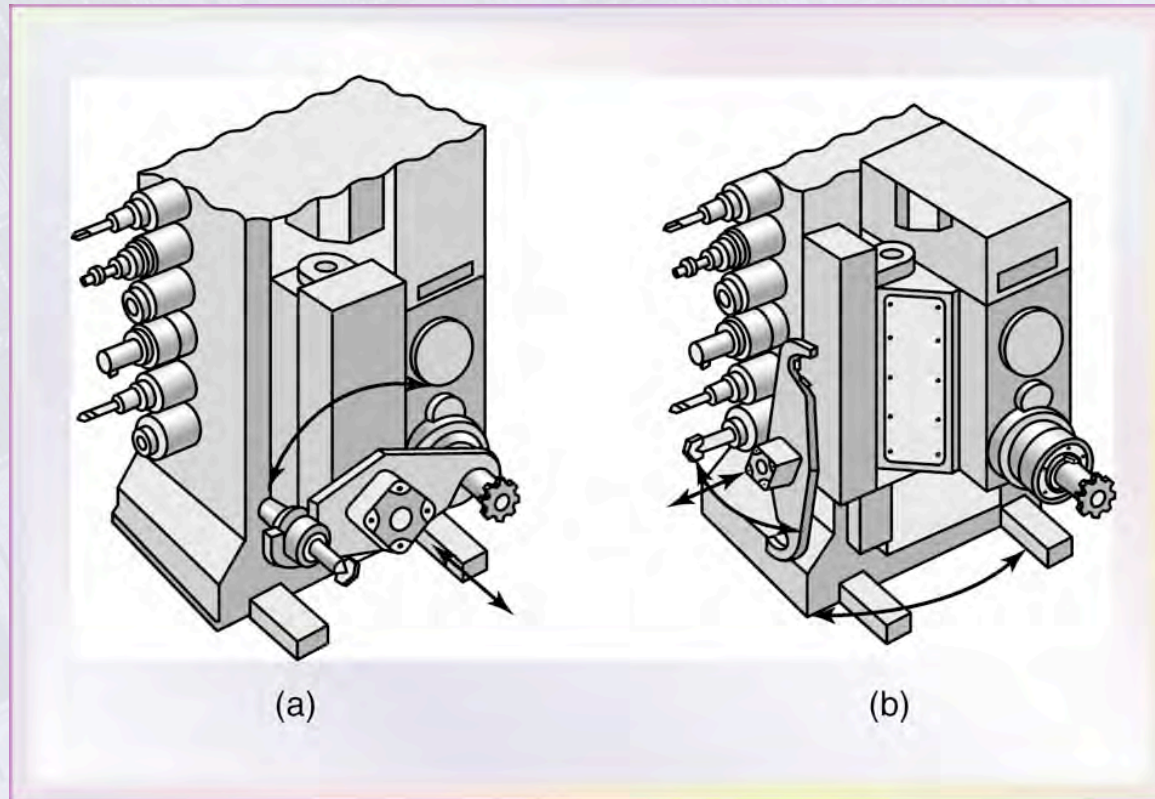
Swing-around tool changer on a horizontal machining center. (a) The tool-exchange arm is placing a toolholder with a cutting tool into the machine spindle. Note the axial and rotational movement of the arm. (b) The arm is returning to its home position. Note its rotation along a vertical axis after placing the tool and the two degrees of freedom in its home position.
